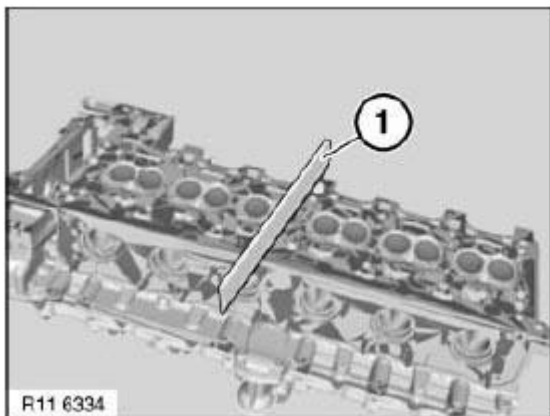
Standard Straight-Edge On Cylinder Head Sealing Faces
